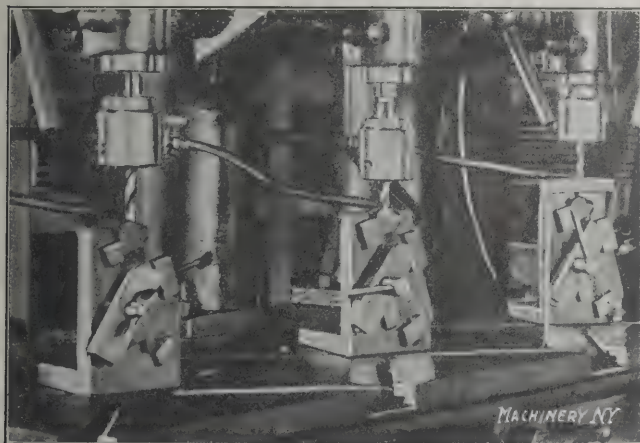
Drilling the Cutter Holes in the Straight Lathe Tool-holder
